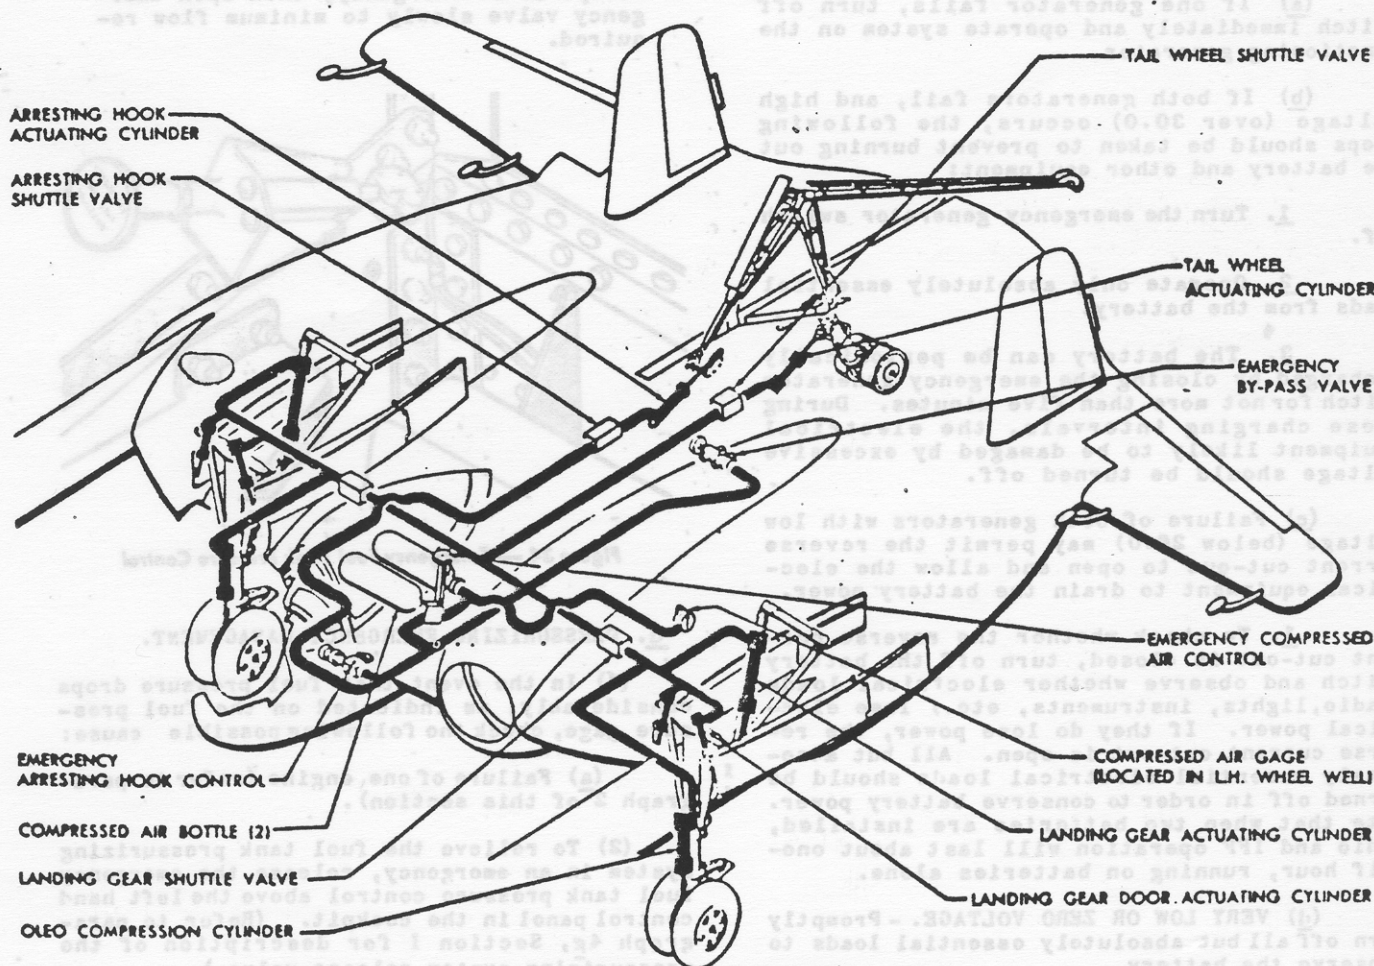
Compressed Air Emergency Landing Gear and Arresting Hook Extension System Diagram
